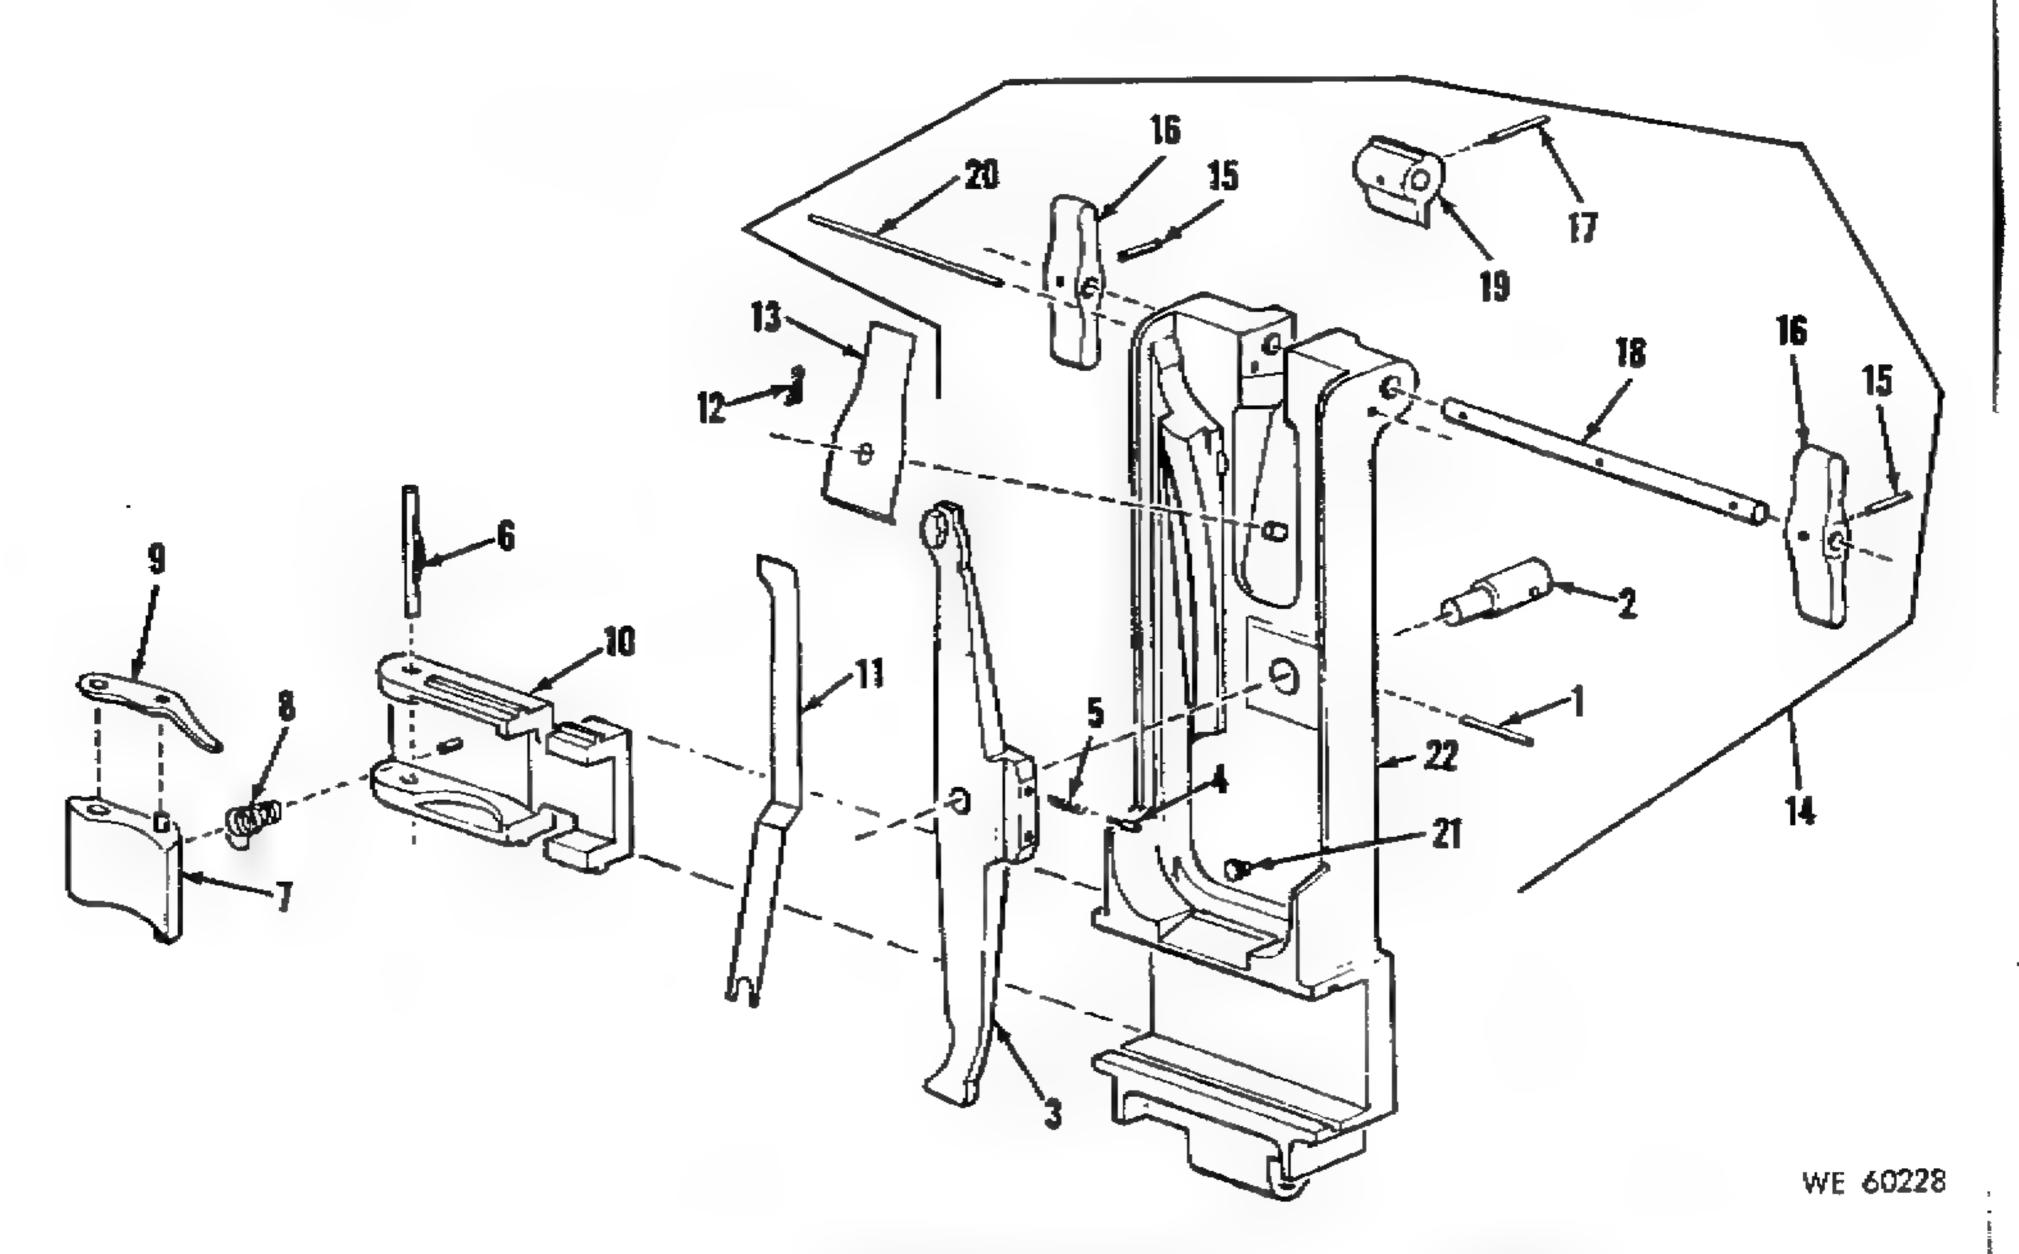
Cover group for Caliber 30 Machine Gun, M37 only—exploded view.
